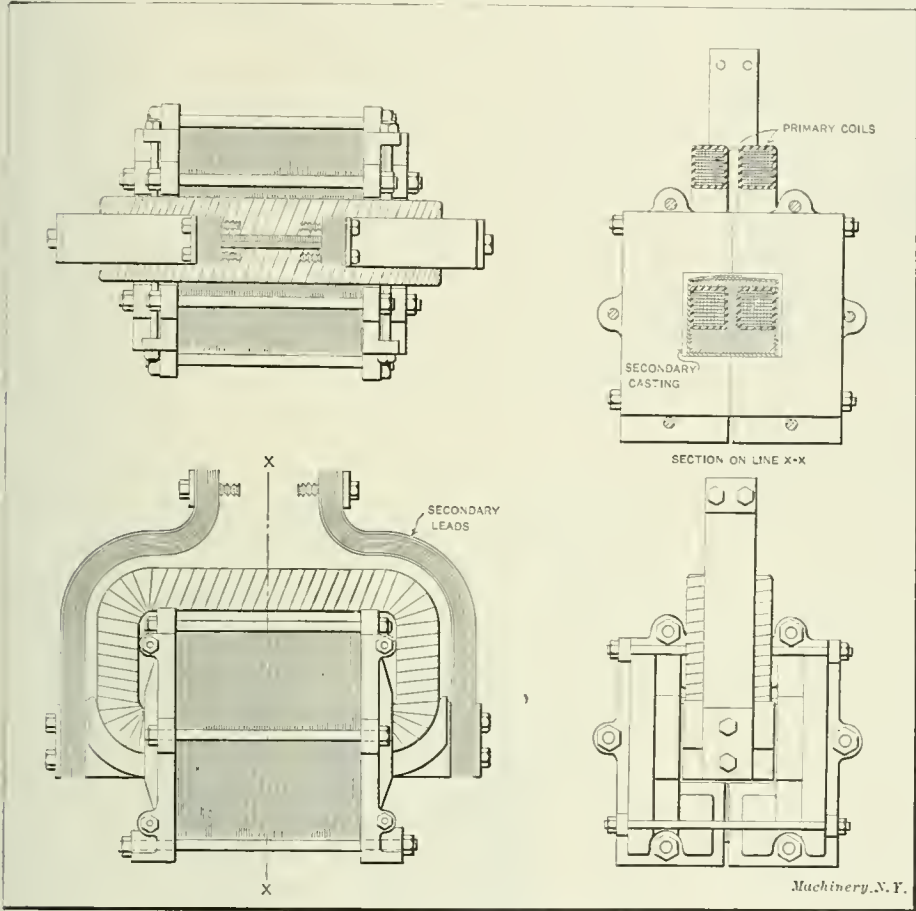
Elevations and Section of a Typical Transformer for Welding Machines
